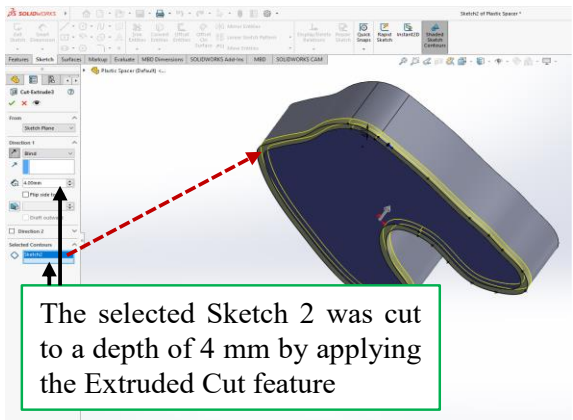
Performing a 4 mm cut on Sketch 2 of the Plastic Spacer component using the Extruded Cut command
